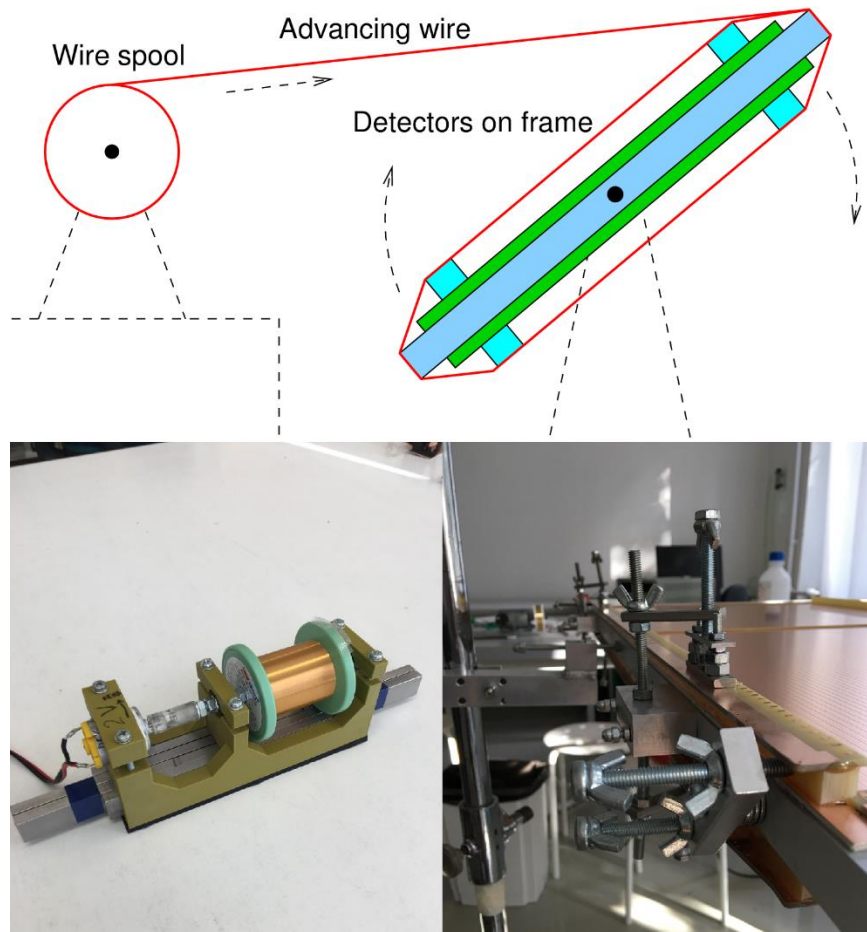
The winding process and its components: the electric motor (left), winding frame (right) with fixing mechanism [14].
